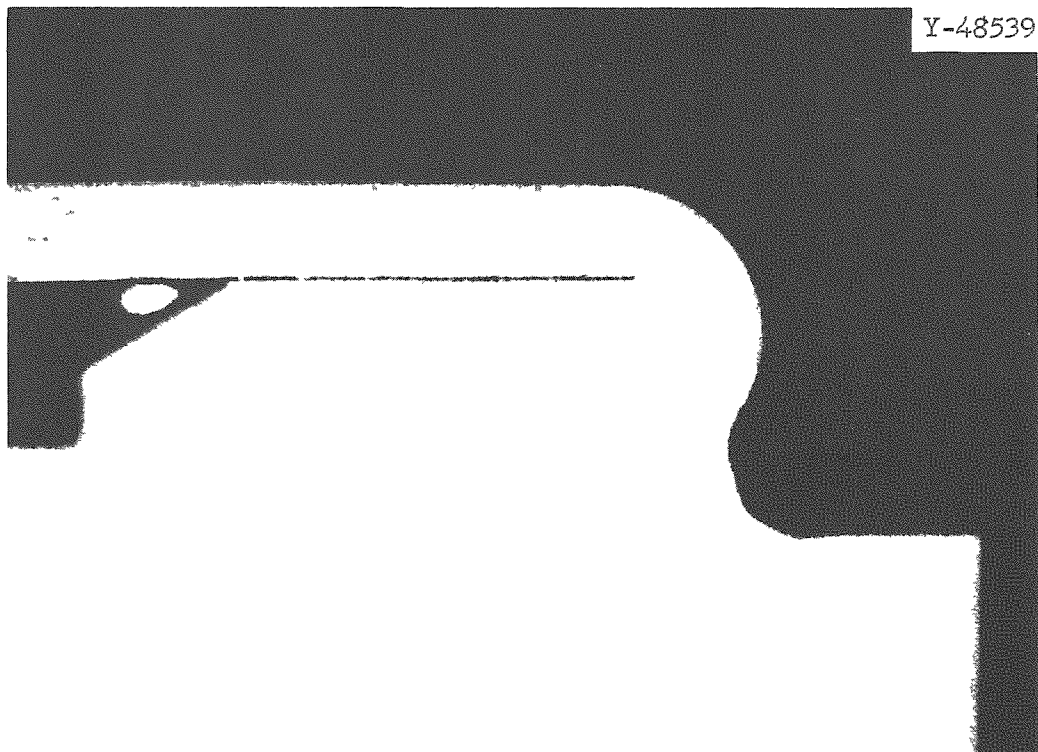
Cross Section of Top End Plug Weld. Etchant: 50 lactic,
